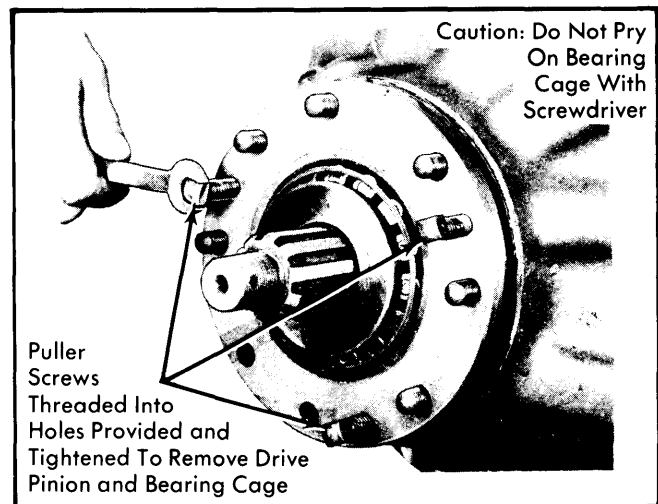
Drive Pinion Shaft and Bearing Cage Removal
